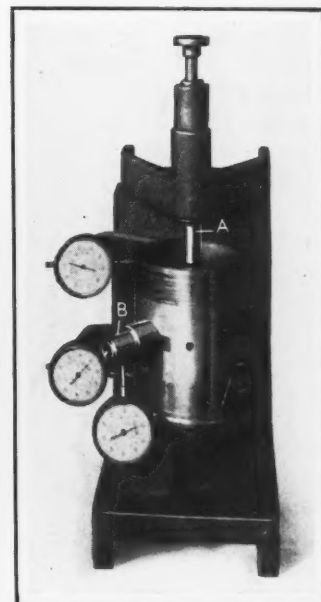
Indicator Fixture Used for Inspecting Pistons
